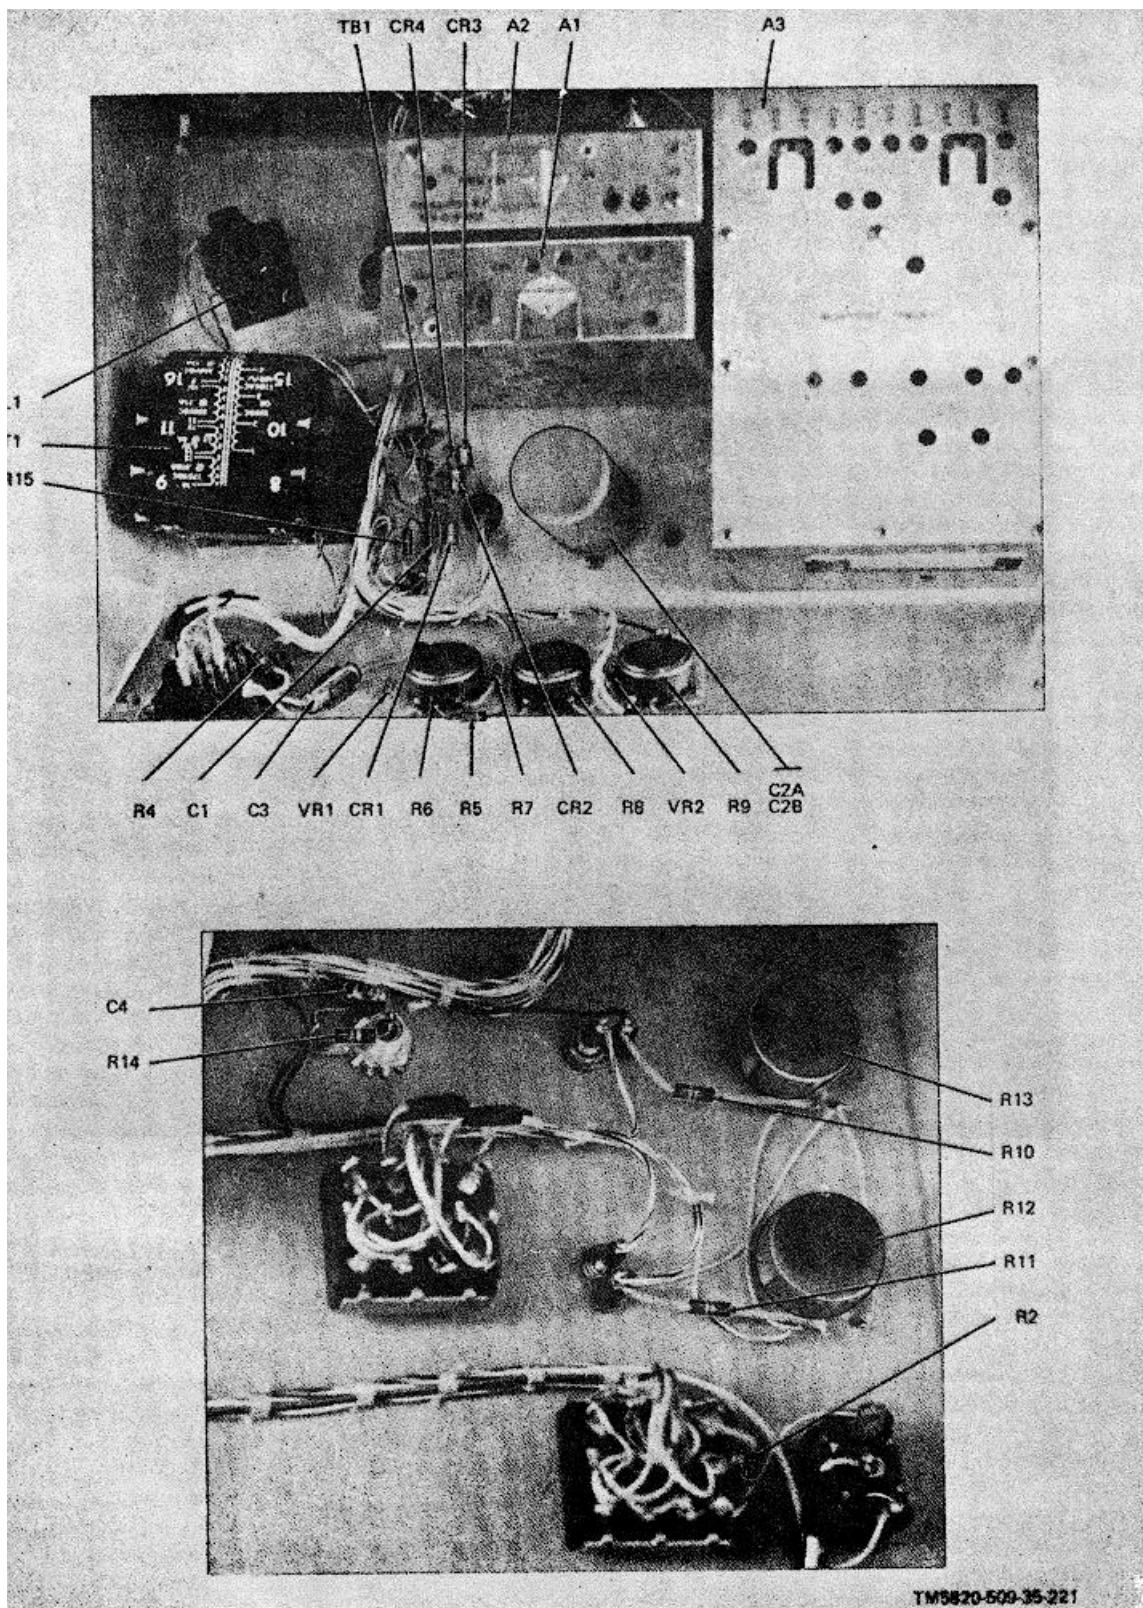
Test Fixture for Signal Data Translator CV-1377A/PRC-47, Parts Location.
